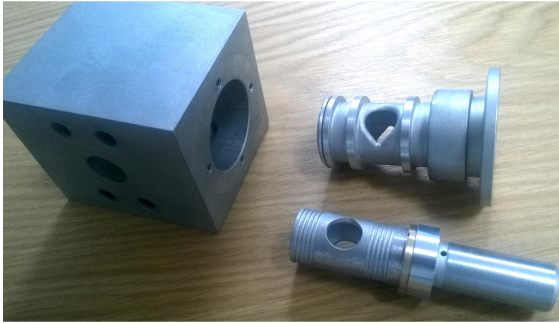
The main manufactured parts of the prototype valve: the valve body, the guiding sleeve inside the main sleeve, the spool with the thrust bearing on it.
